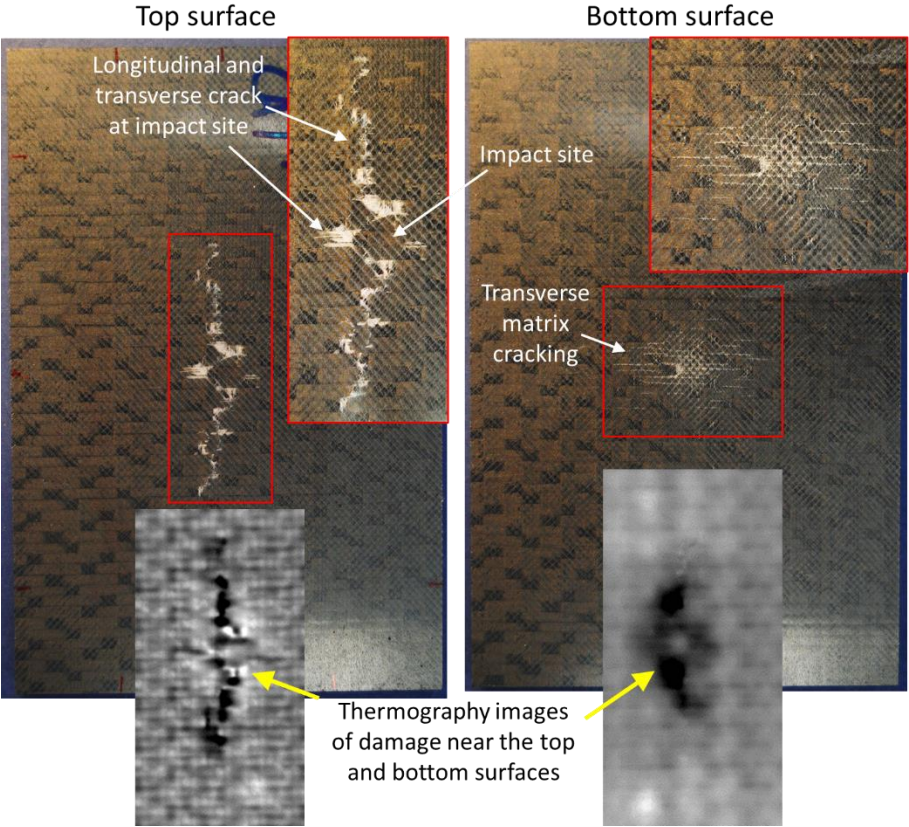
Impact damage on the top and bottom surface of a CFRE LTL warp-direction CAI specimen
